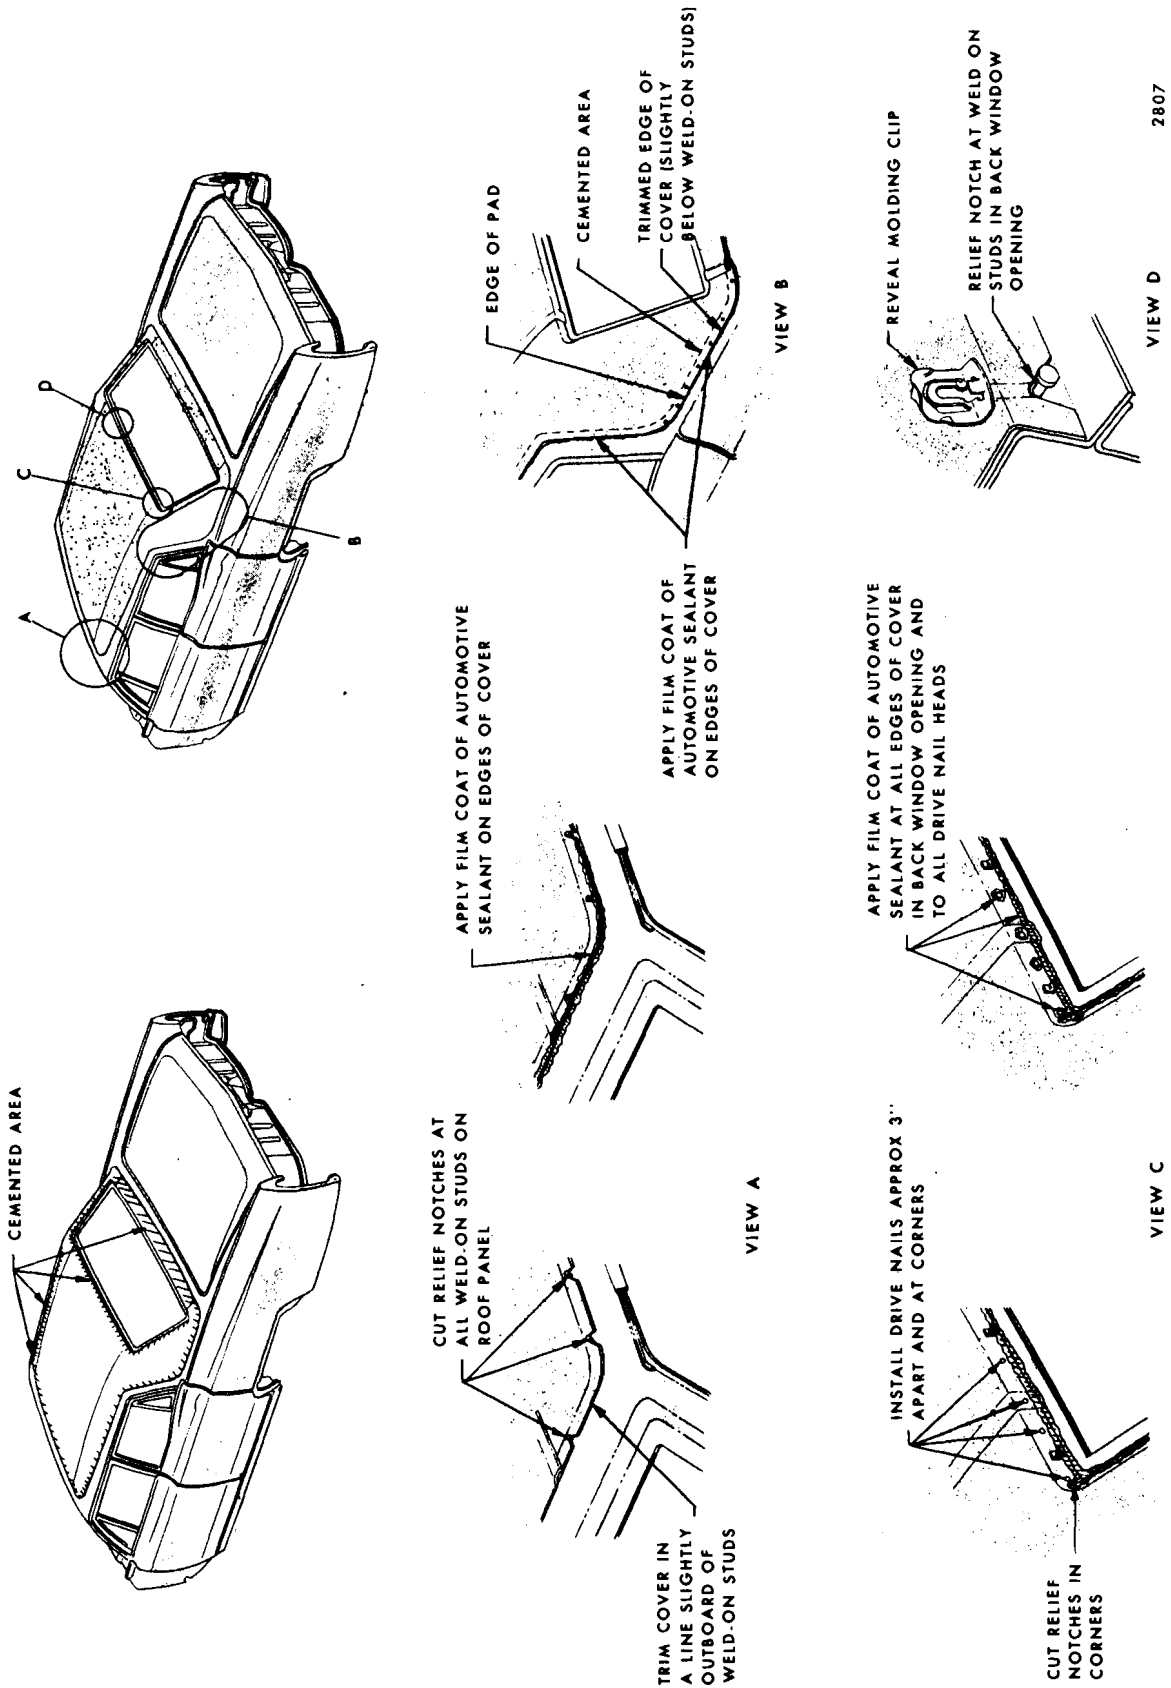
Typical Fabric Roof Cover Installation with Pad and Roof Panel Moldings
